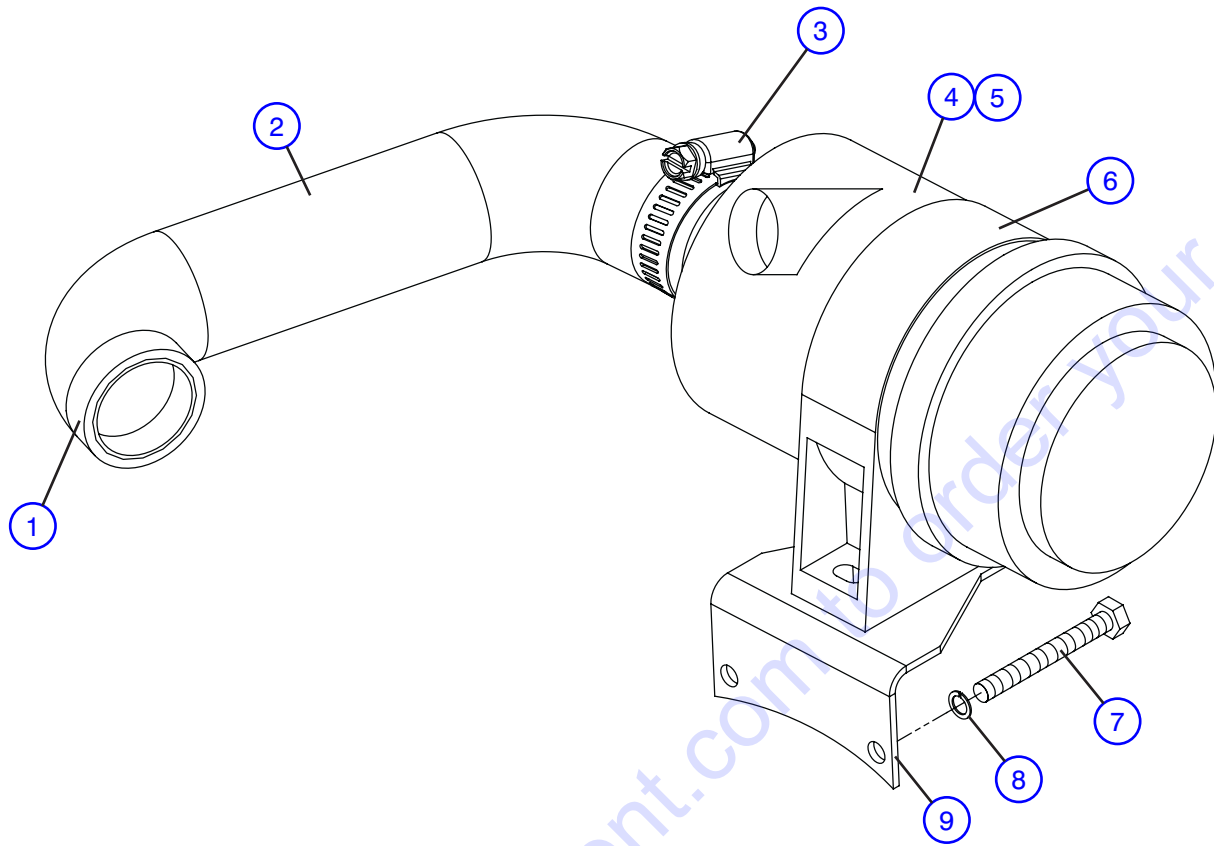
Engine Assembly (Kubota Engine D902) (Continued)
